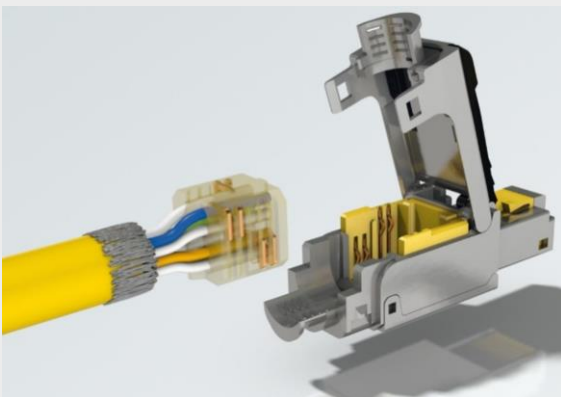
Assembly step 3 – Inserting the assembled preLink® cable into the selected connector
